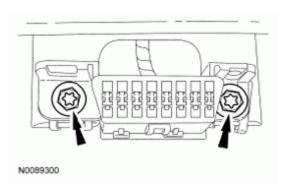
Locating Data Link Connector Screws Courtesy of FORD MOTOR CO.
